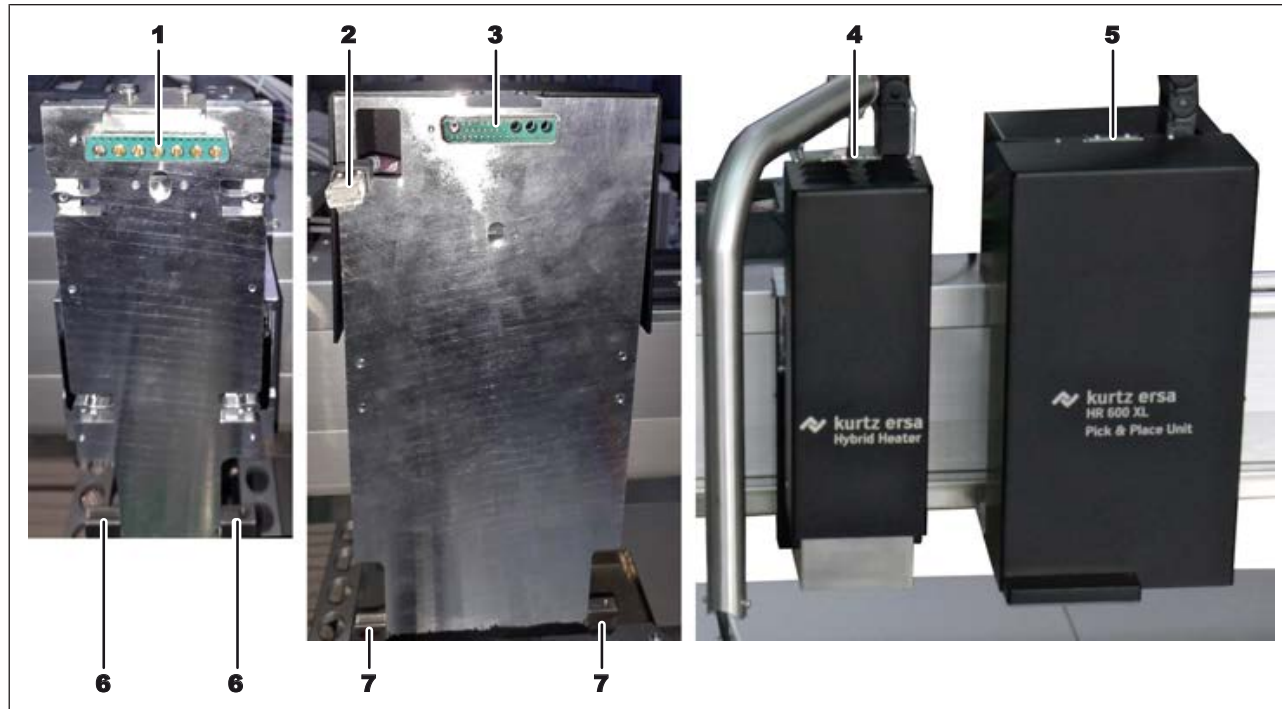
Example images: Heating head holder (left) and placer head holder. Right: Heating and placer heads screwed on.
